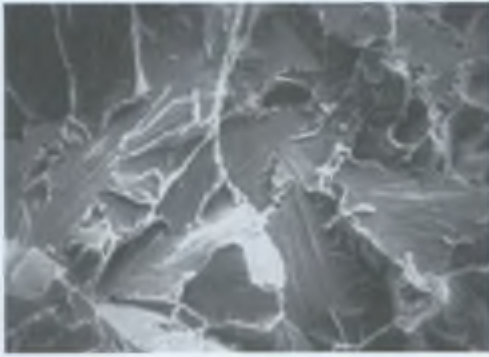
Fracture surface of steel that has failed in a brittle manner; the fracture path is transgranular (through the grains). Magnification: 200 \times . Source: Courtesy of B.J. Schulze and S.L. Meiley and Packer Engineering Associates, Inc.
